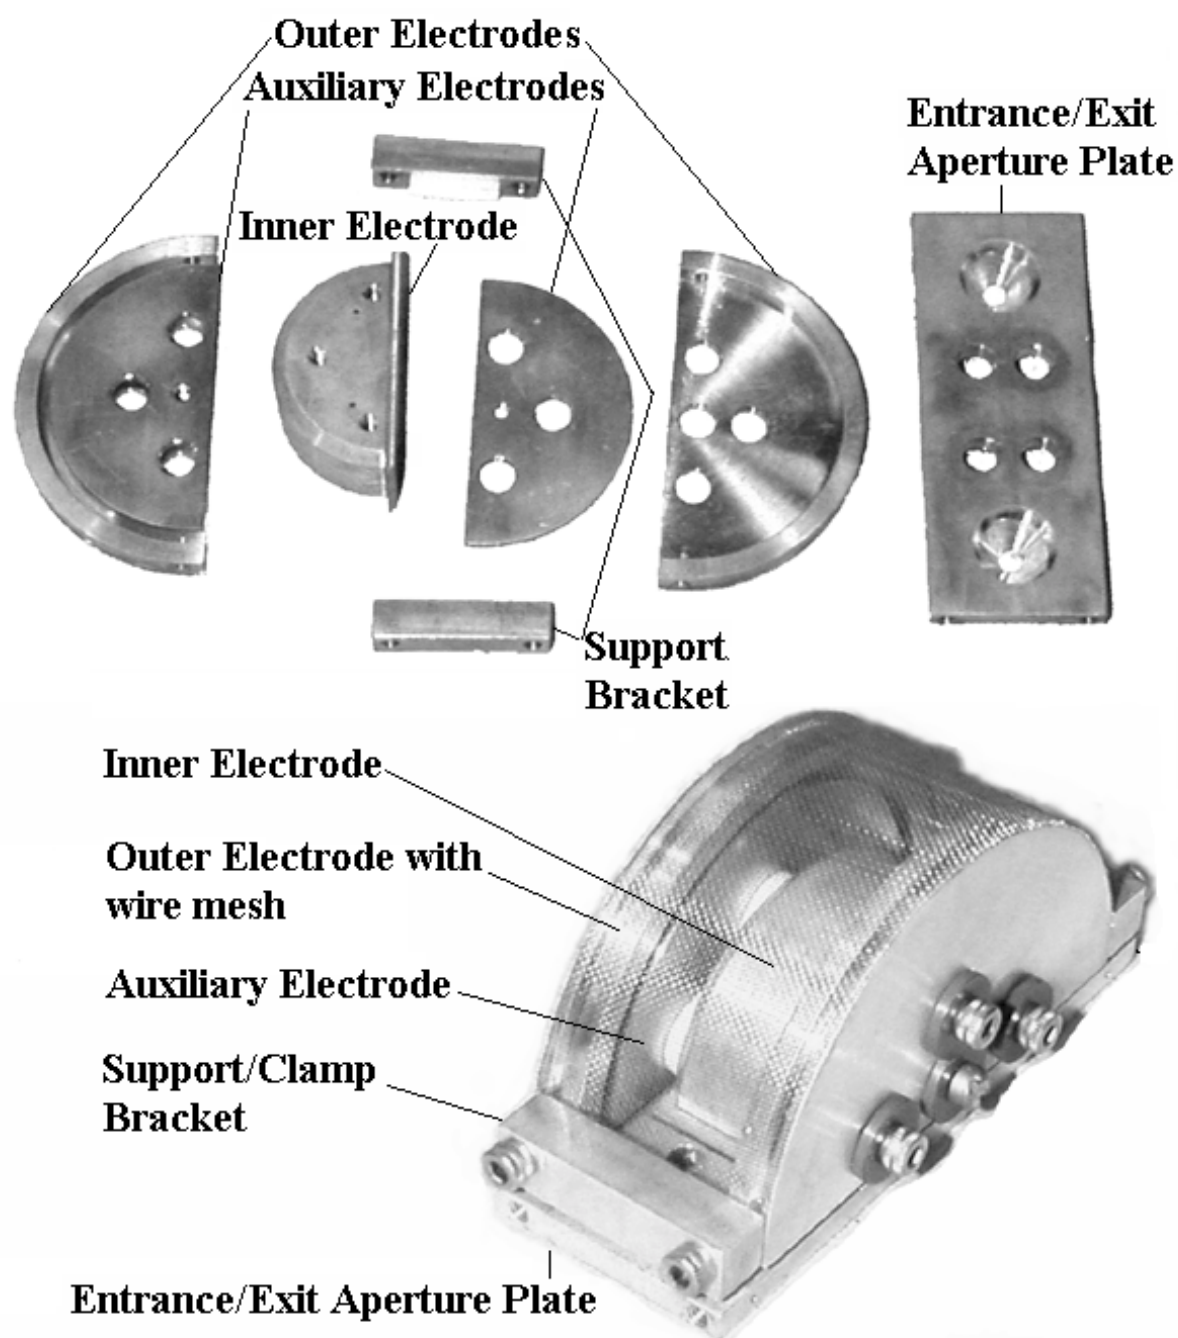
Top figure shows energy analyzer disassembled displaying all machined electrode pieces. Bottom figure shows analyzer assembled with necessary bolts and insulating ceramic washers. Bottom picture is slightly larger than actual size.
